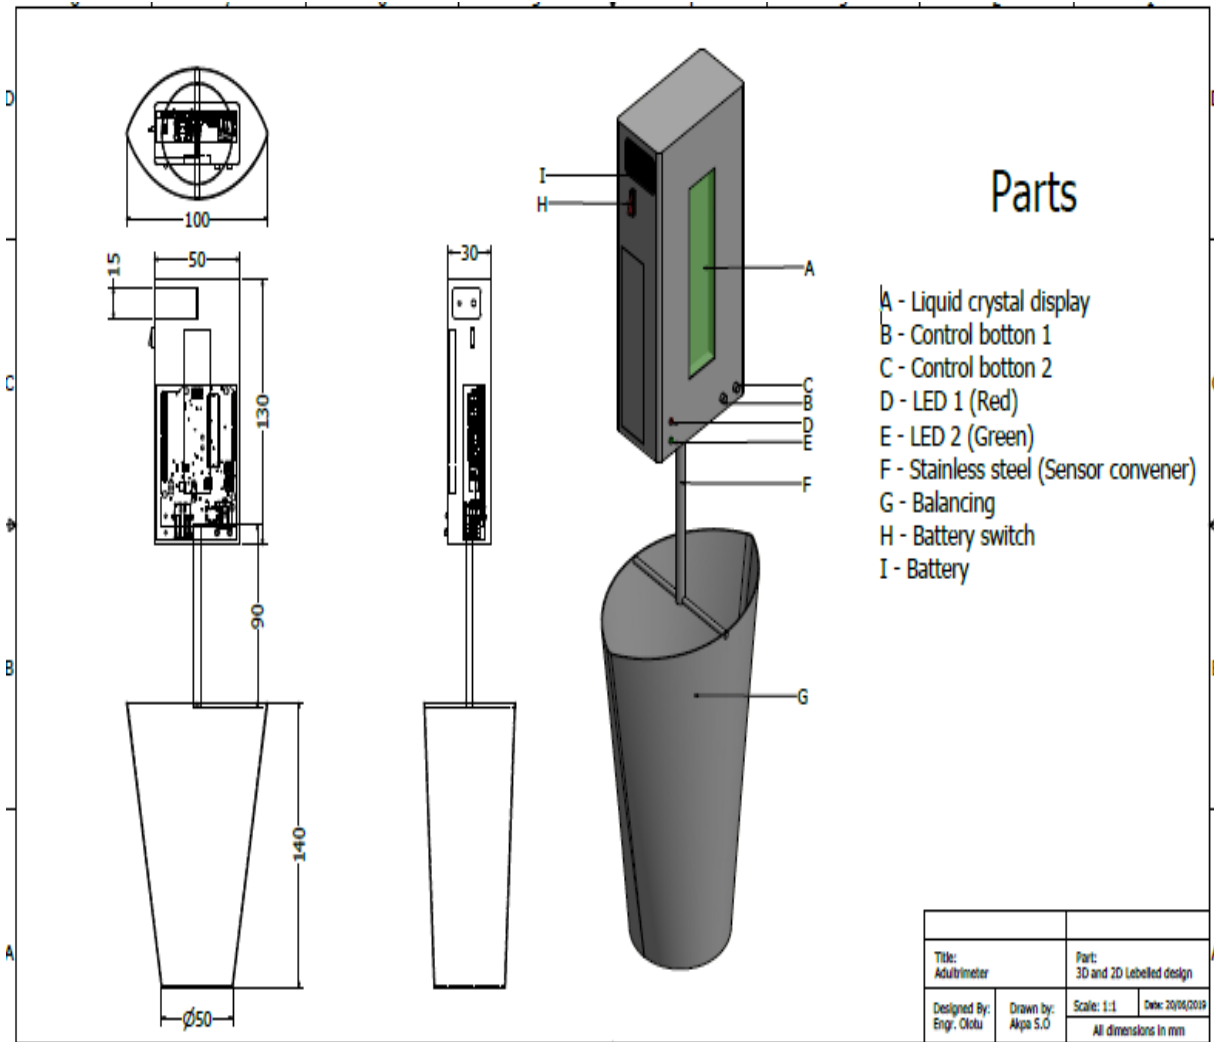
2 and 3 Dimensional AUTOCAD Drawings
